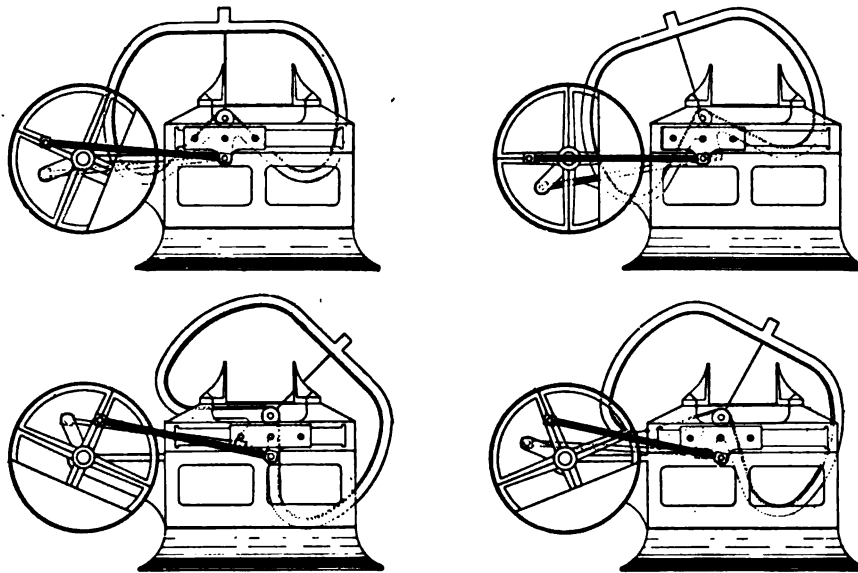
Sectional Views of Reciprocating Oscillating Side Cut Table.
